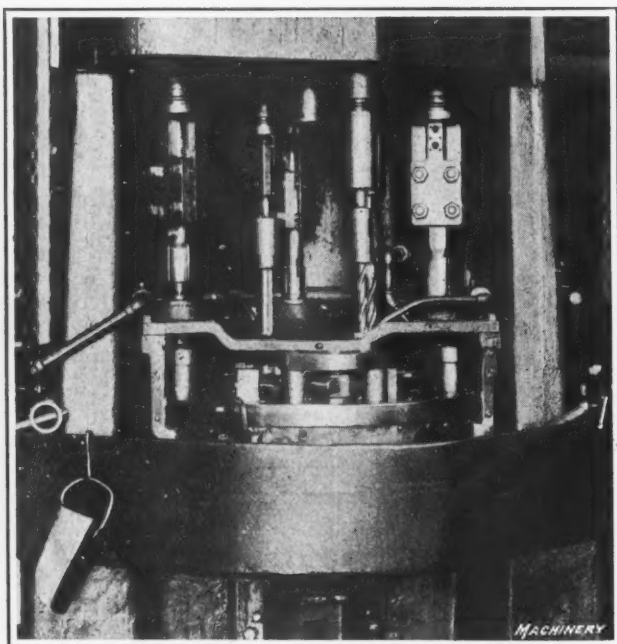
Semi-automatic Machine of Special Design for drilling and boring Connecting-rods
